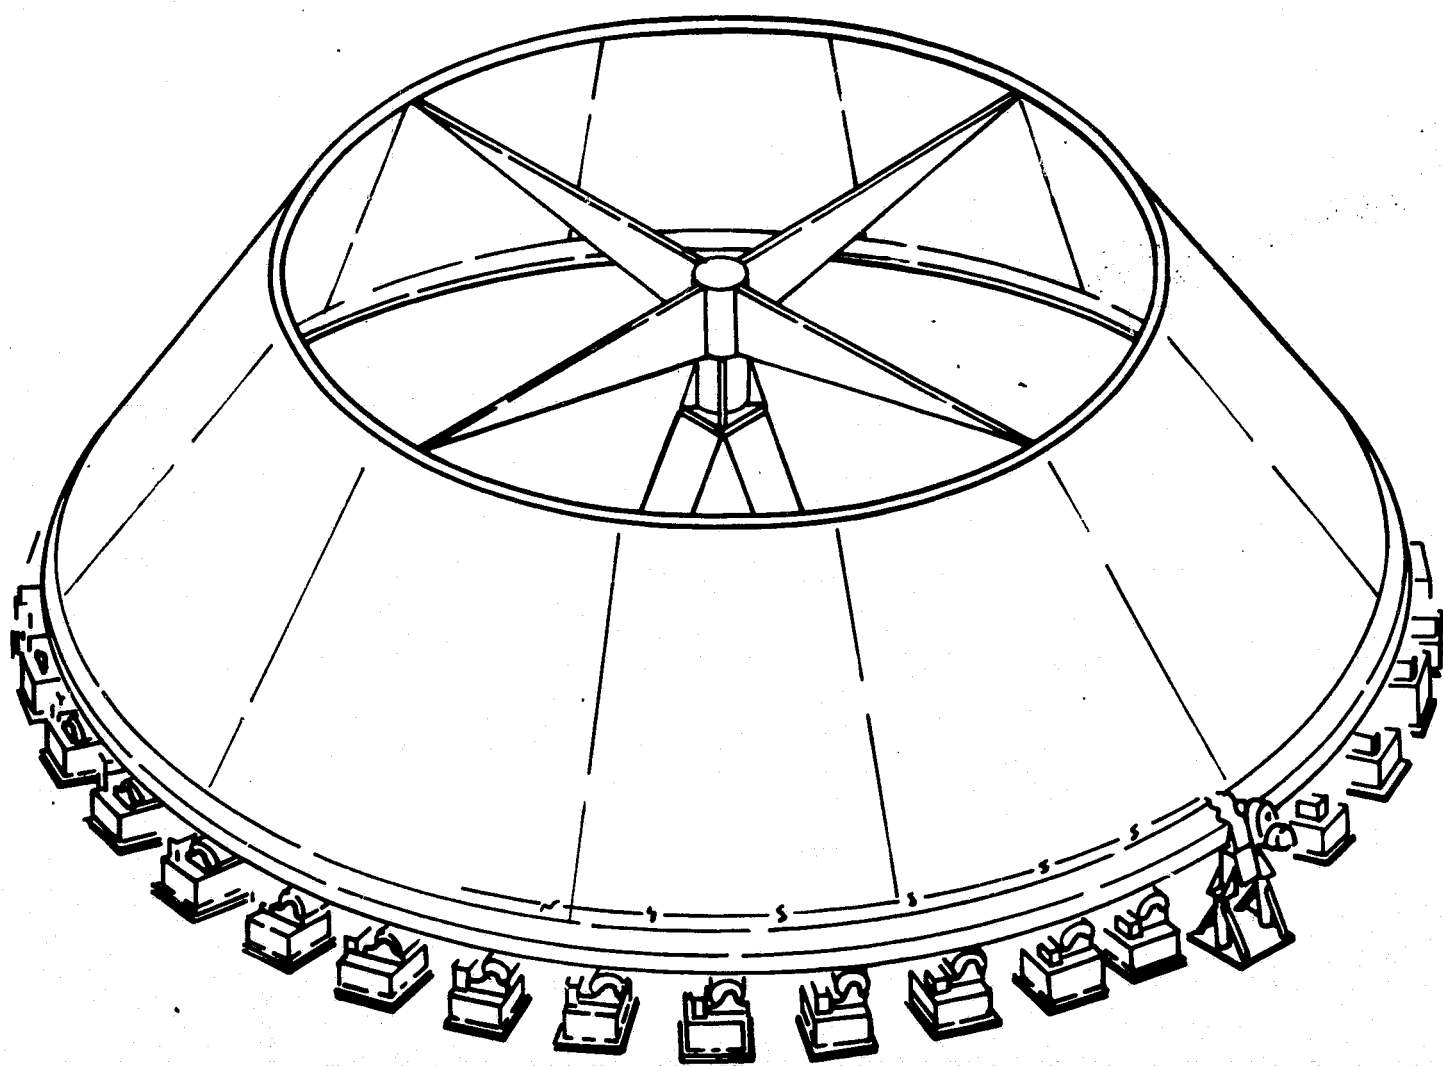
BASE PLUG - OUTER FACE SKIN RING WELD AND TRIM FIXTURE
